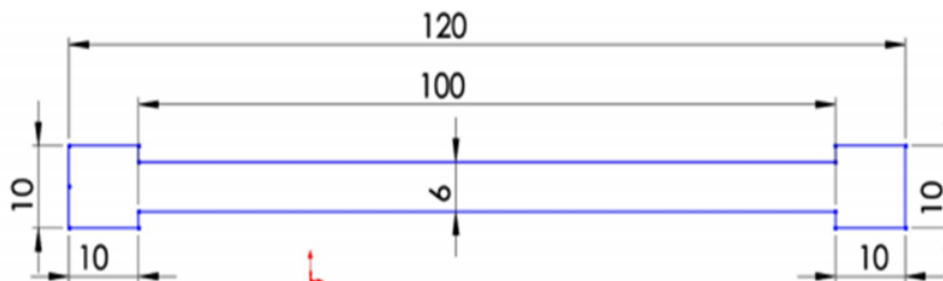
9. The Final Dimension of Tensile Test Specimen 2D Drawing
